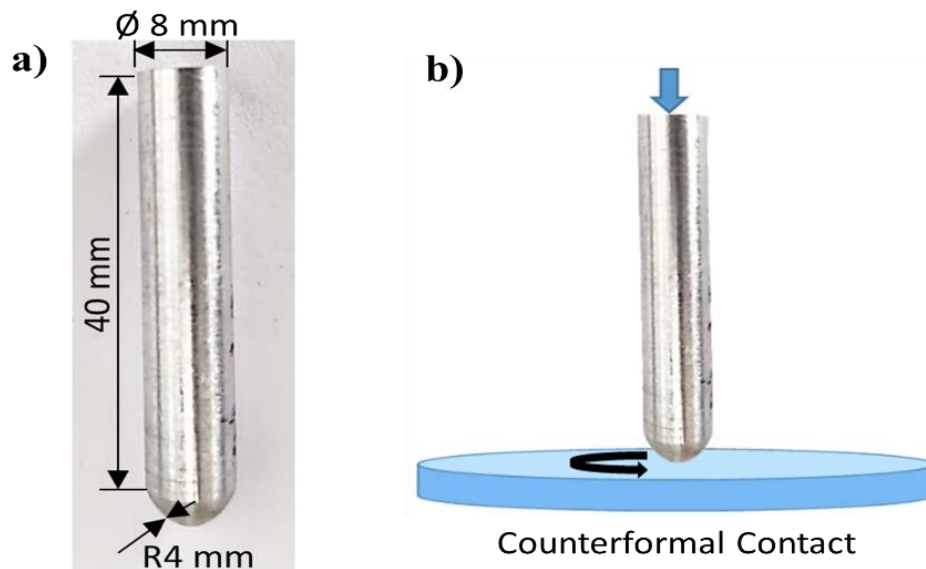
(a) Pin-on-disc wear testing specimen as per ASTM G99, (b) counterformal contact of sliding wear.
